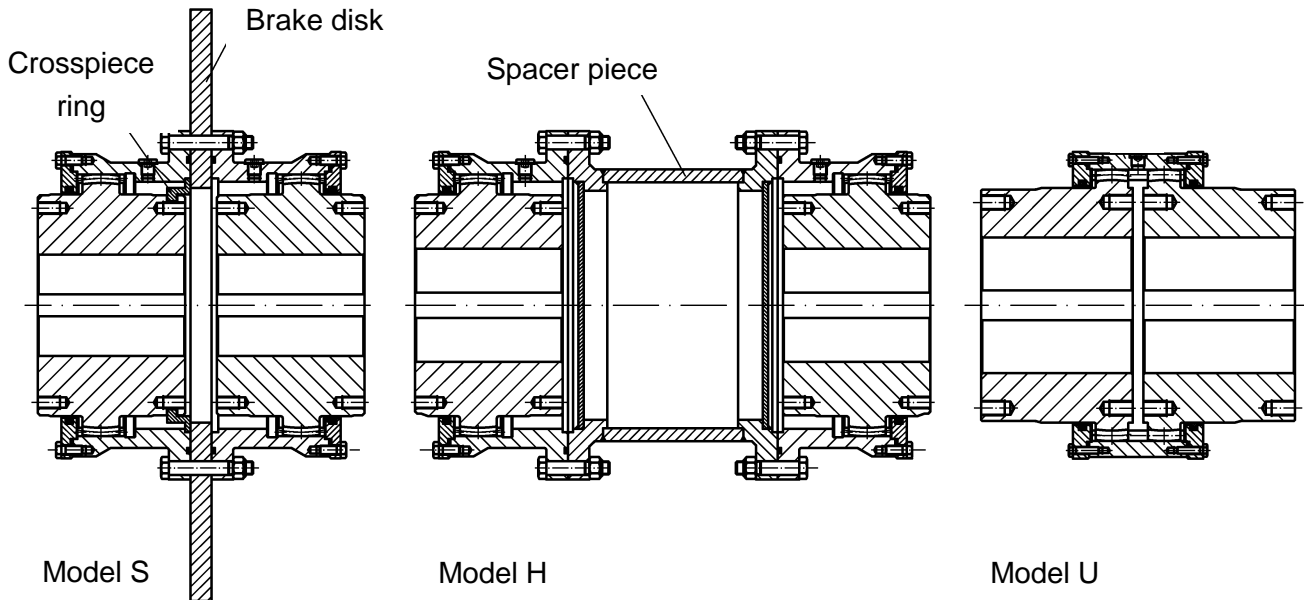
Assembly of a gear coupling series ZAKU-N, Type S, H and U
